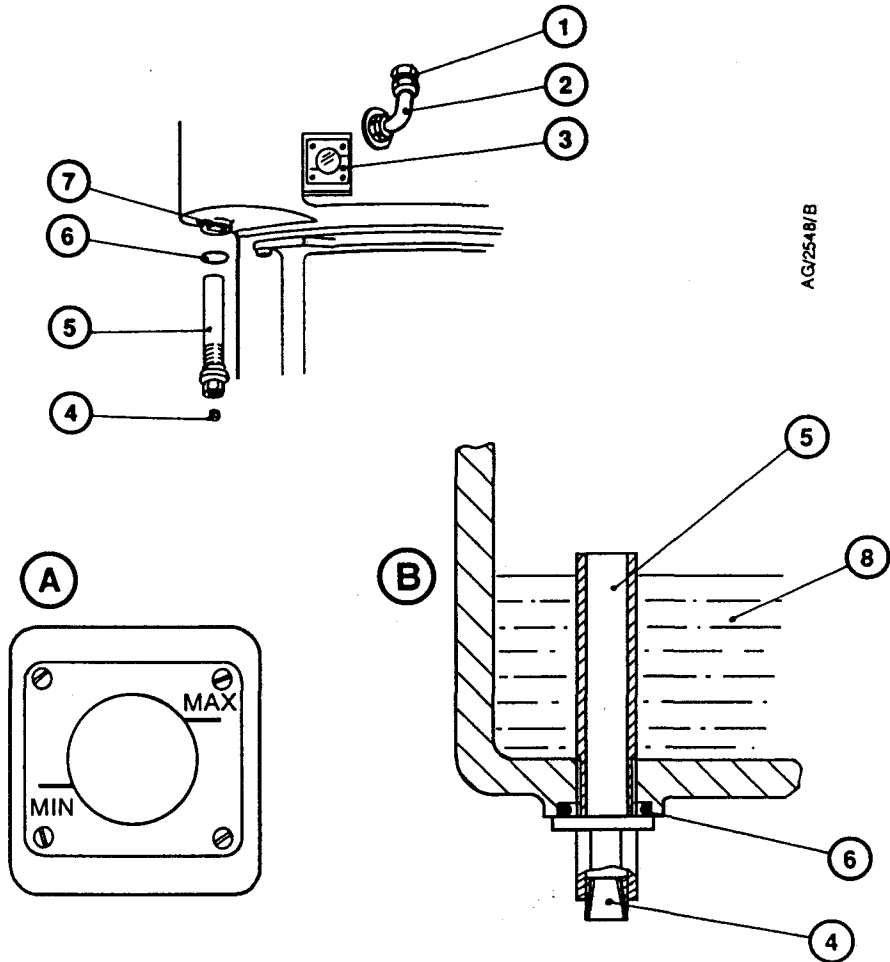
shows the locations of the two oil-level sight-glasses on the pump. Refer to Figure 10, detail A and check that the pump gearbox oil-level is at the MAX mark on the bezel of either of the two oil-level sight-glasses. If the oil-level is below the MAX mark:
